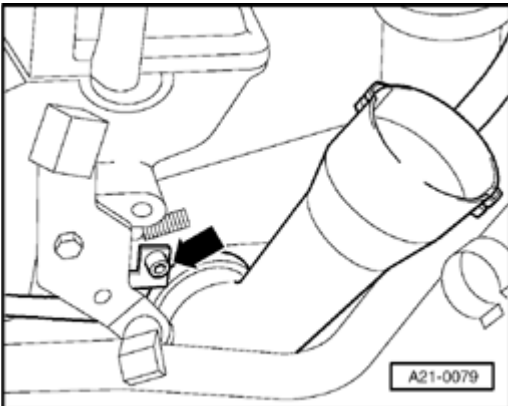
Unbolting Retainer Piece For Oil Supply Line From Turbocharger
